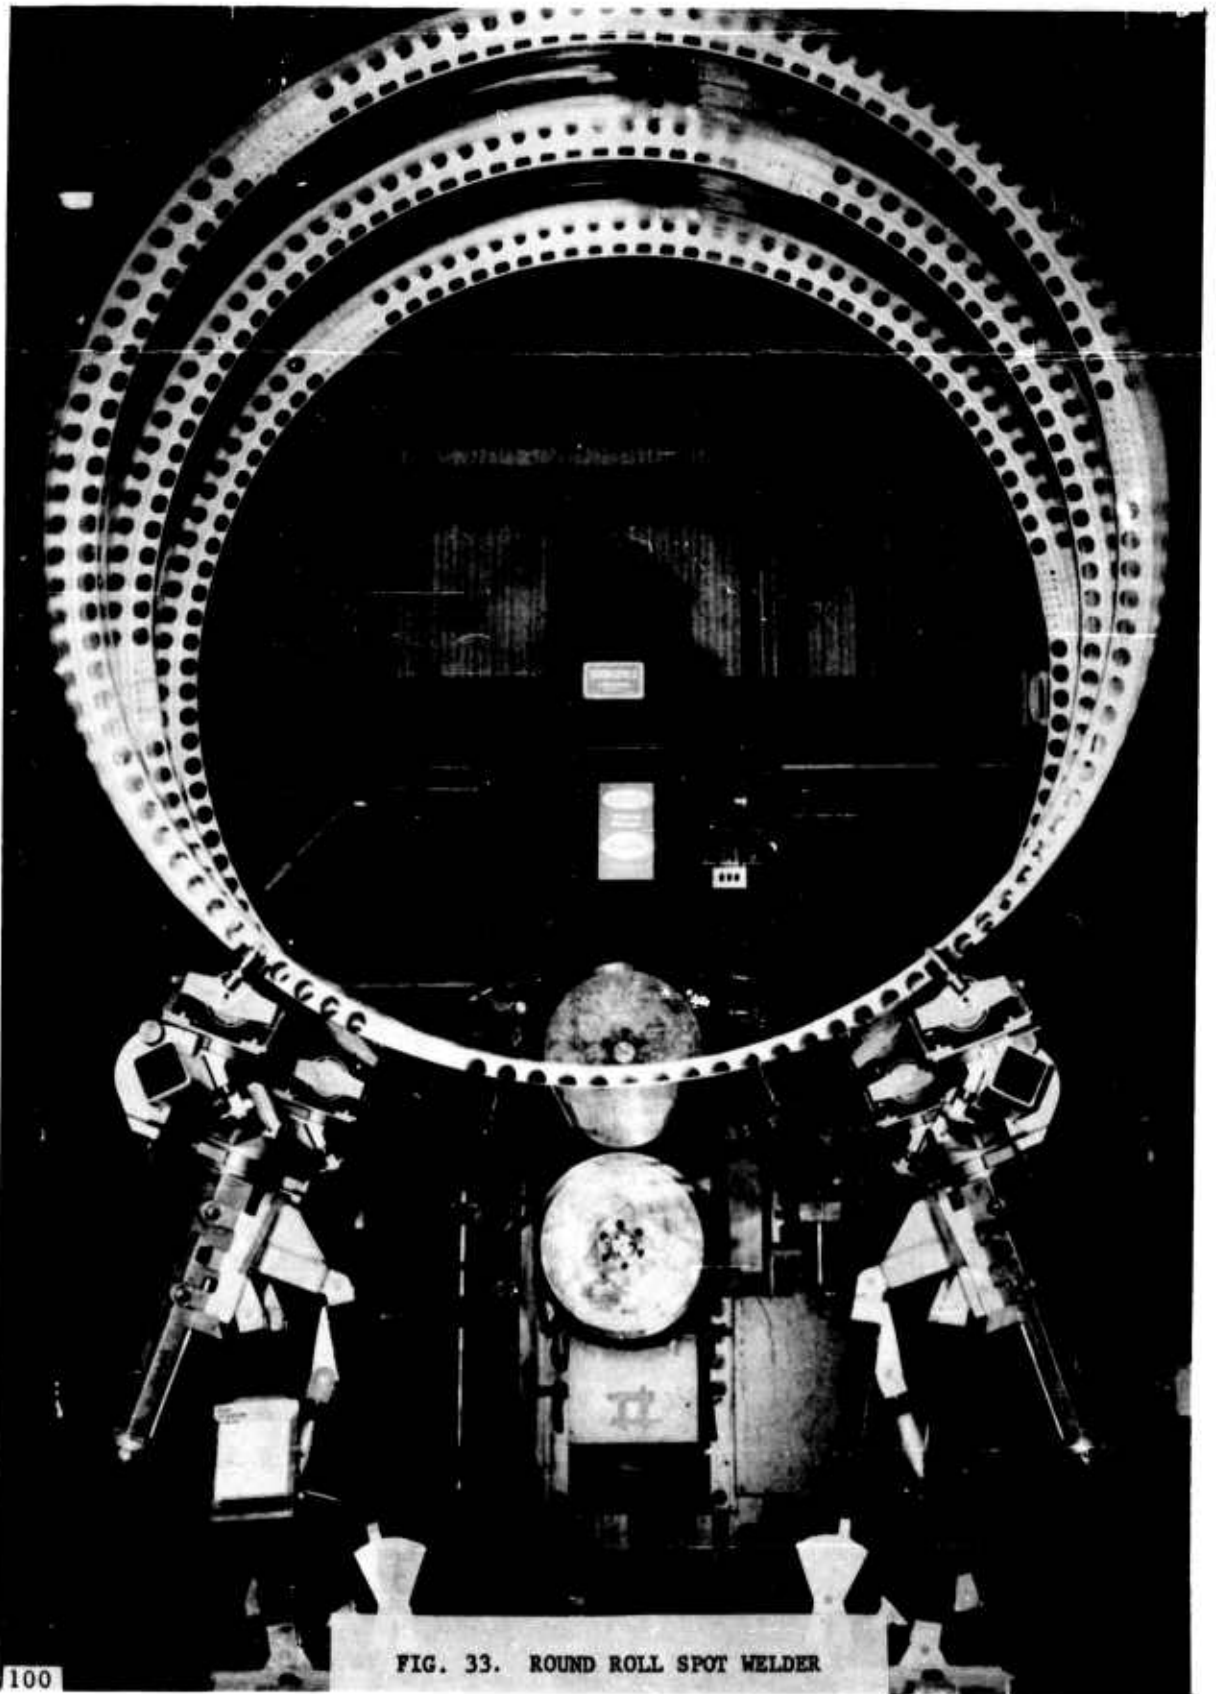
ROUND ROLL SPOT WELDER
